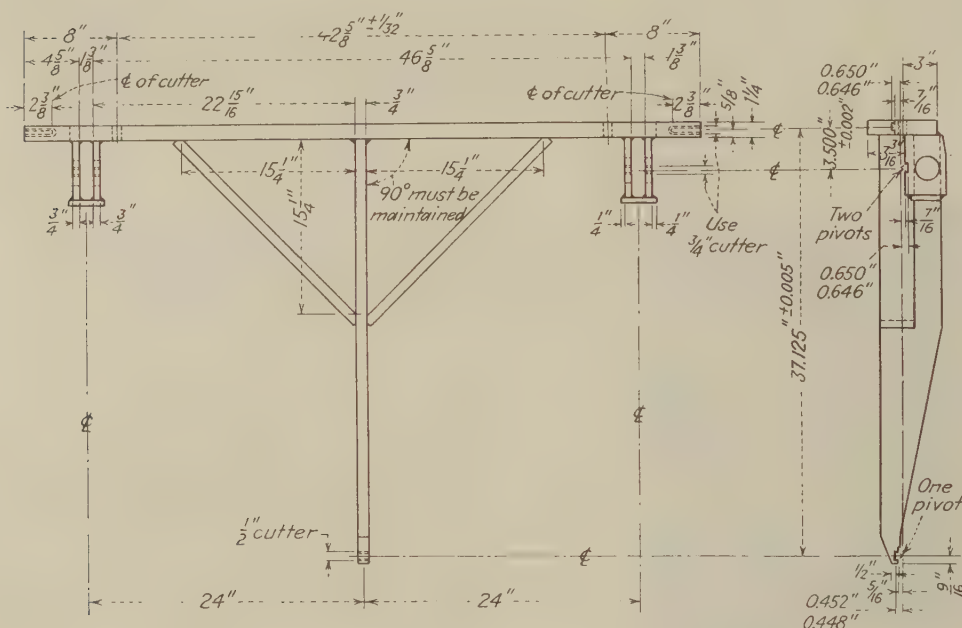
This drawing of a typical main lever shows the location of five dovetail seats that have to be milled to receive knife edges that are pressed into place.
